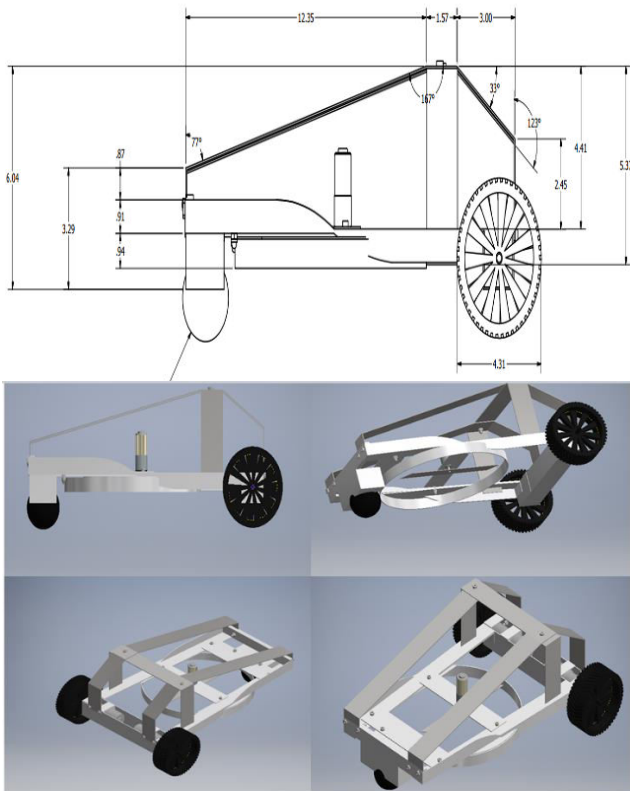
Design and simulation of sketched car robot using Autodesk Inventor.
